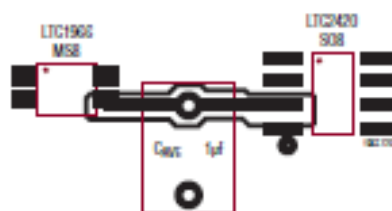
PCB Layout of Figure 25b with Guard Ring
